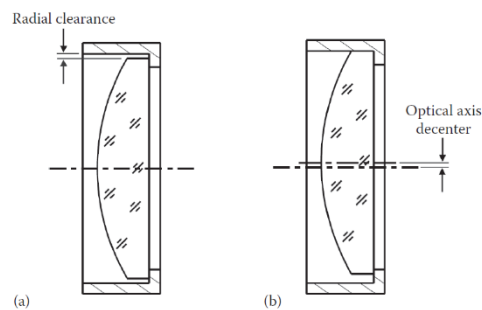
Example of mounting scheme where optics has true radial runout tolerance.
